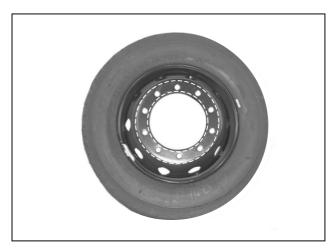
In production the flanged nut to wheel surface the stud holes are masked off with decals VH 10539192
